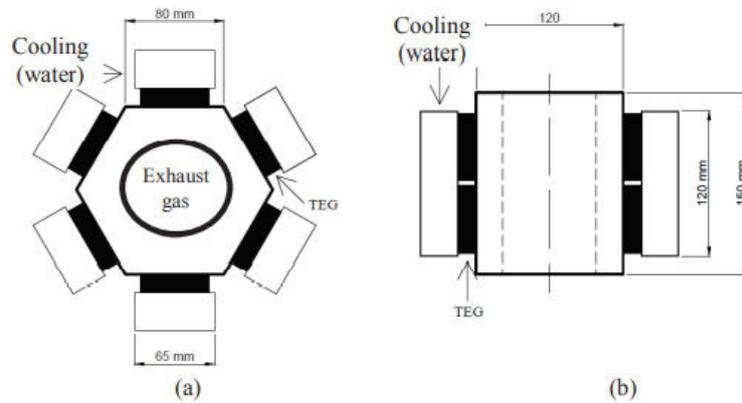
(a) Top view of the assembly of the apparatus TEG; (b) Side view of the assembly of the apparatus TEG
